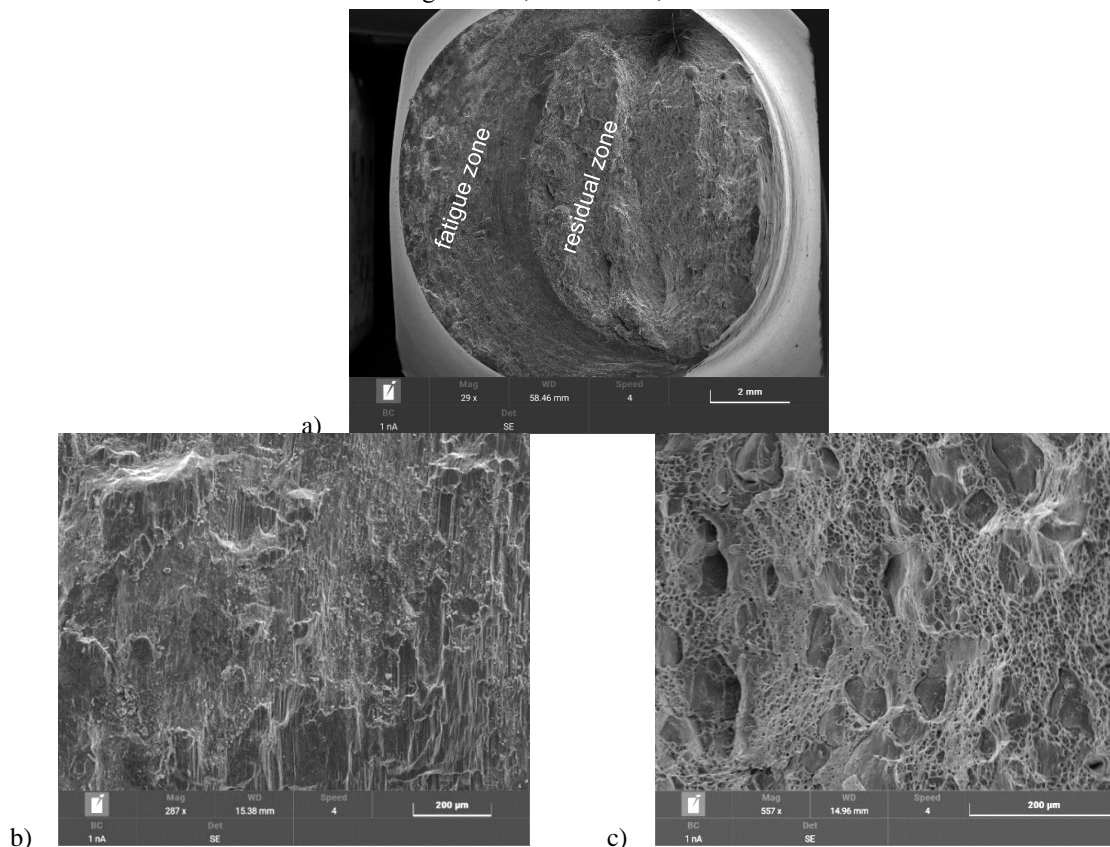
Fatigue fracture of the alloy after T6 treatment caused by torsion, a) fracture morphology, b) surface in the area of the fatigue zone, c) surface in the area of the residual zone (specimen 25 – 24 122 cycles).
